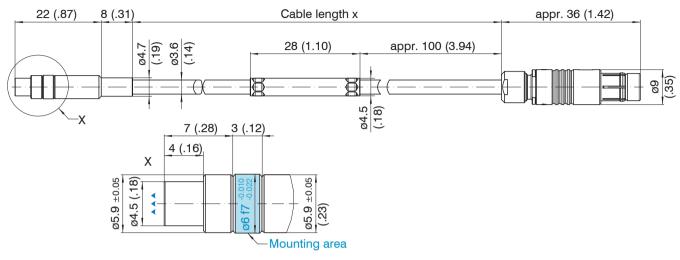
Dimensional drawing sensors ES-U1-T-CAx/mB0, dimensions in mm (inches)
